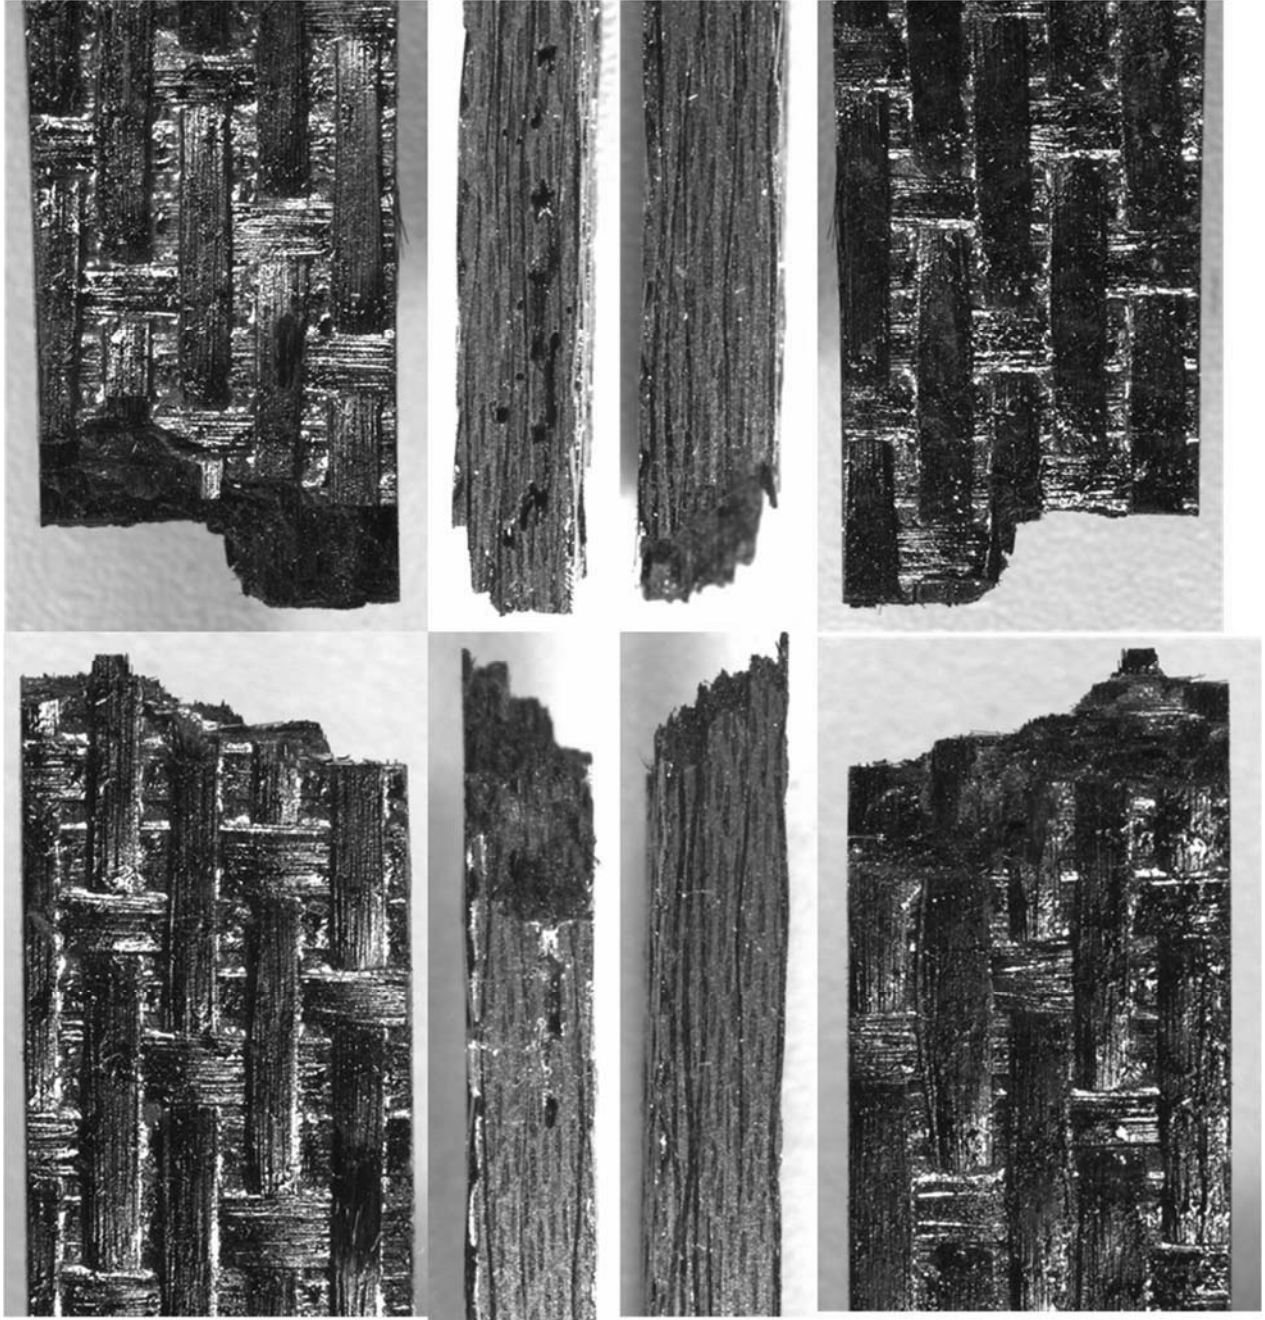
Top and bottom fracture surfaces of specimen 16-057, tested in fatigue to failure at 1200°C in air. $\sigma_{\max} = 160$ MPa, $N_f = 1,220$.
